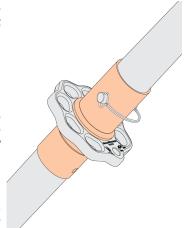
ATTACHMENT TO GREY PERF TUBE
